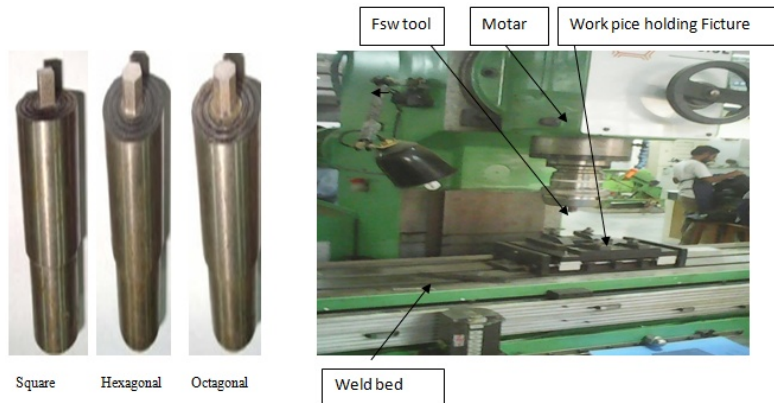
Fabricated tools and experimental set-up of F.S.W
